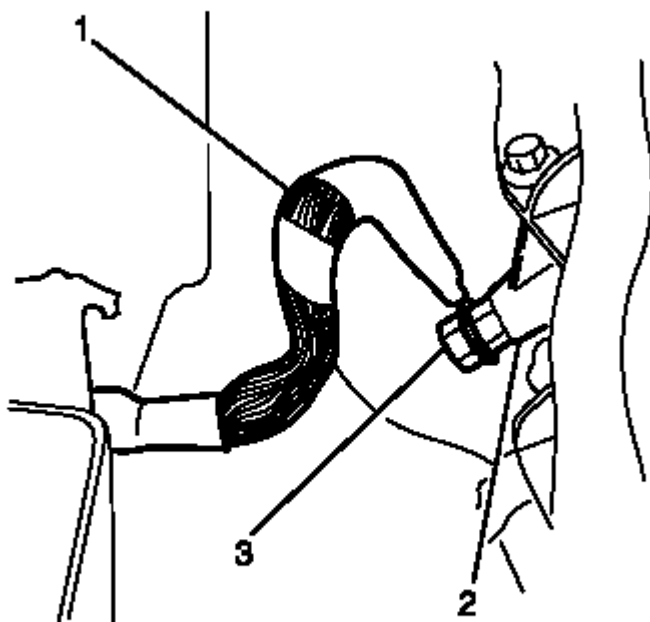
Identifying Engine Connector, Locking Tang & Body Harness Connector
